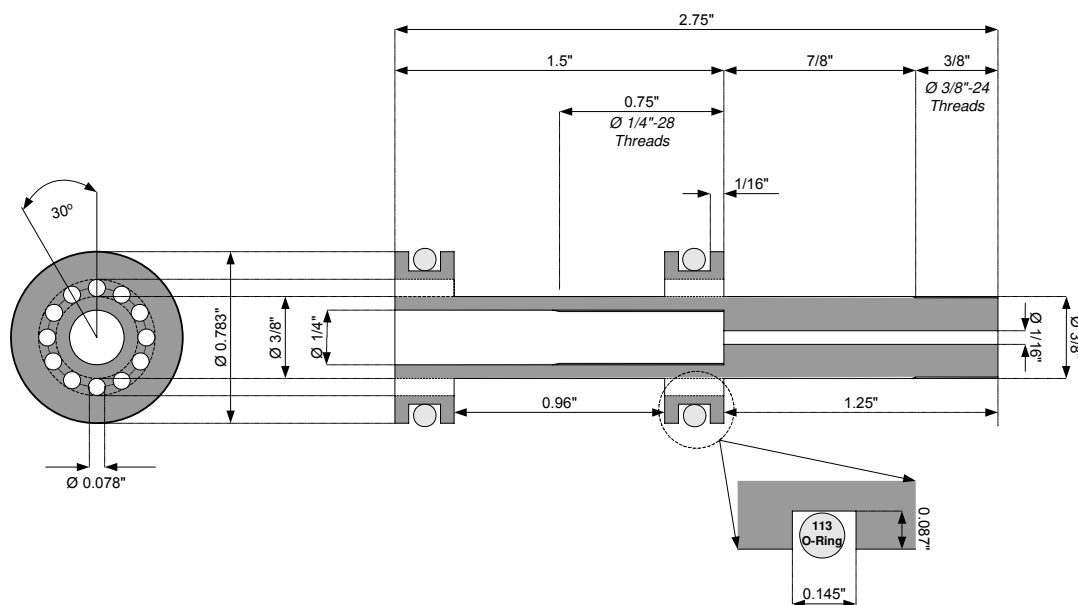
Design drawing of "rock carrier" (SS316) used to center probe in reactor and hold rock samples.
